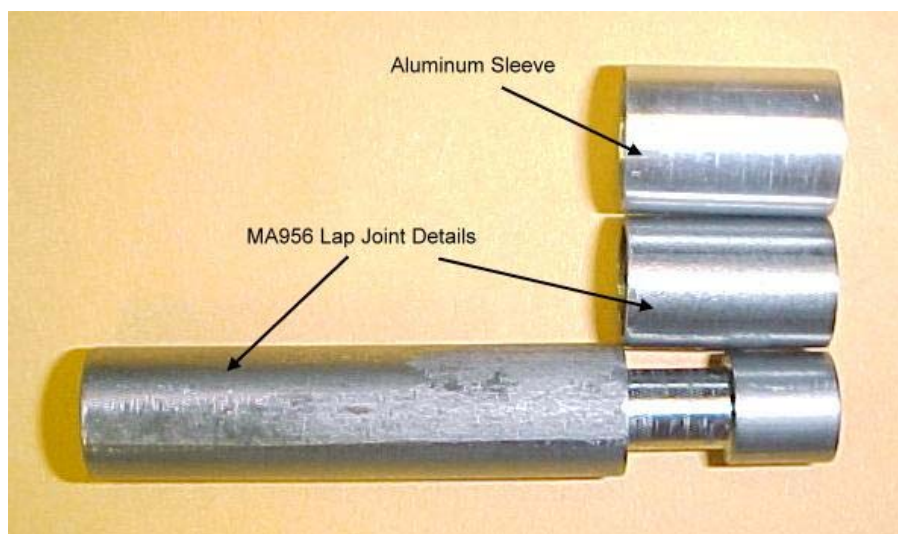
Weld Details for Magnetic Impulse Welding
